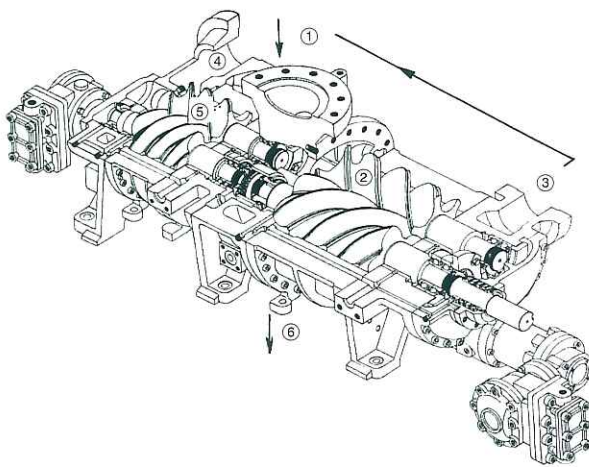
3225C Compressor with Explosion-proof Indicator, Oblique Sectional View
